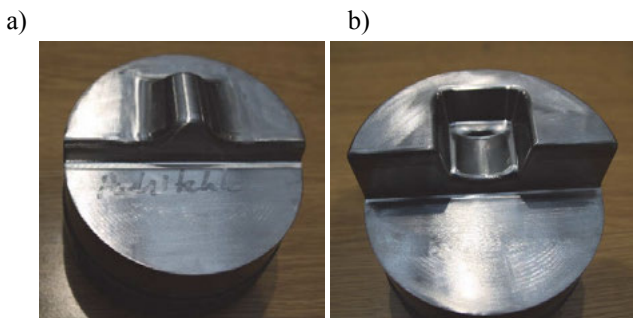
A view of die inserts used in first operation (after the change): a) upper flattening tool (after the change) and b) lower flattening tools
